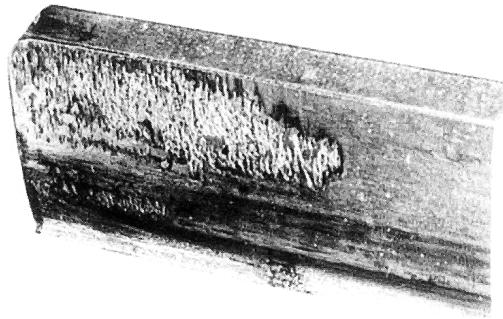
Image of surface damaged by gear tooth scuffing/seizing (resulting from out-of-parallel meshing of teeth) [3]
